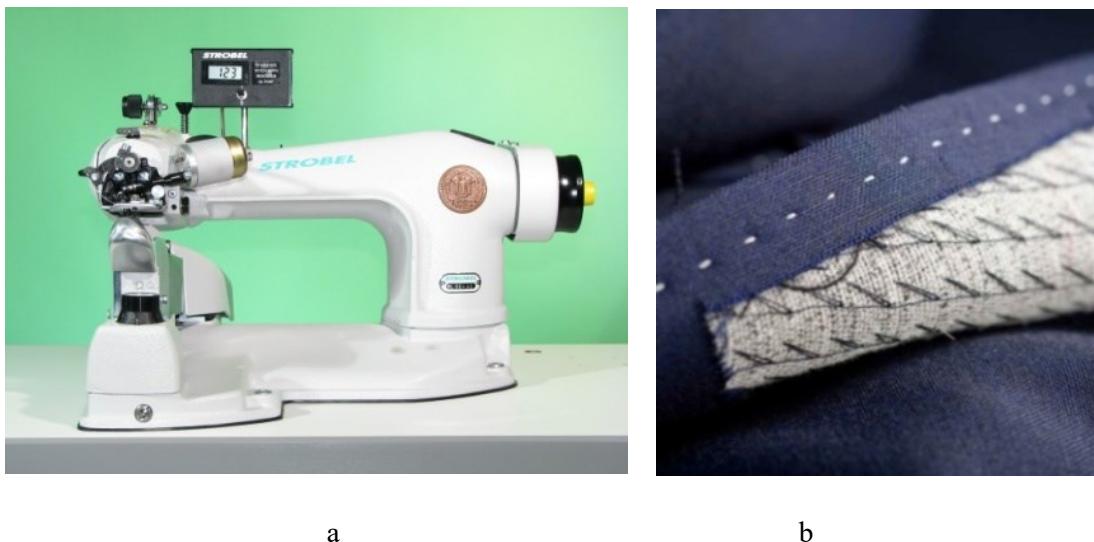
Padding machine Strobel 58-4D (a) and padding with stitch type 103 (b)
